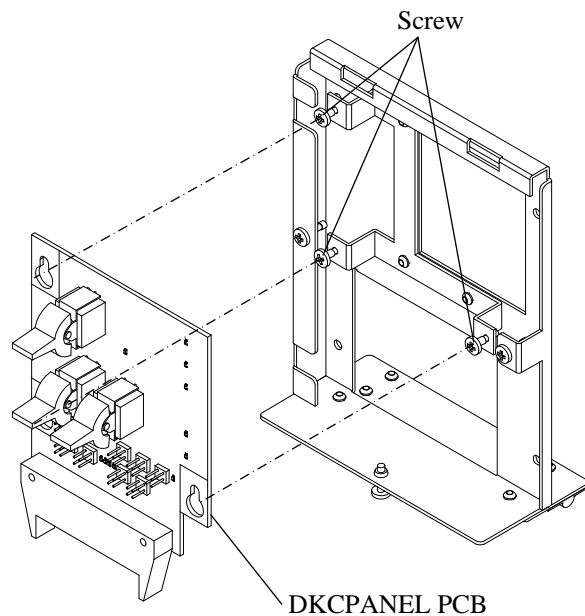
Removal of DKCPANEL PCB
